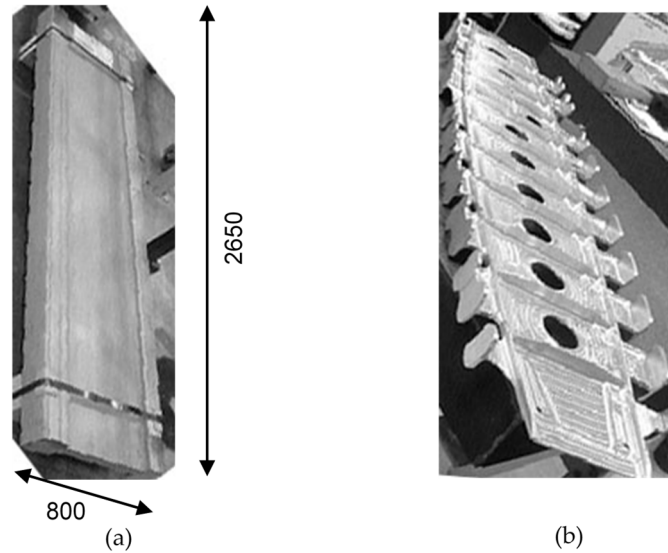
Schematic of the rib-2 support structure: (a) extruded alloy, (b) machined part.
